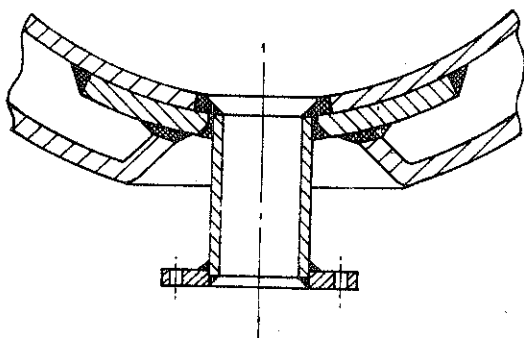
Bottom outlet pipe with reinforcing ring welded to head and jacket welded to ring
